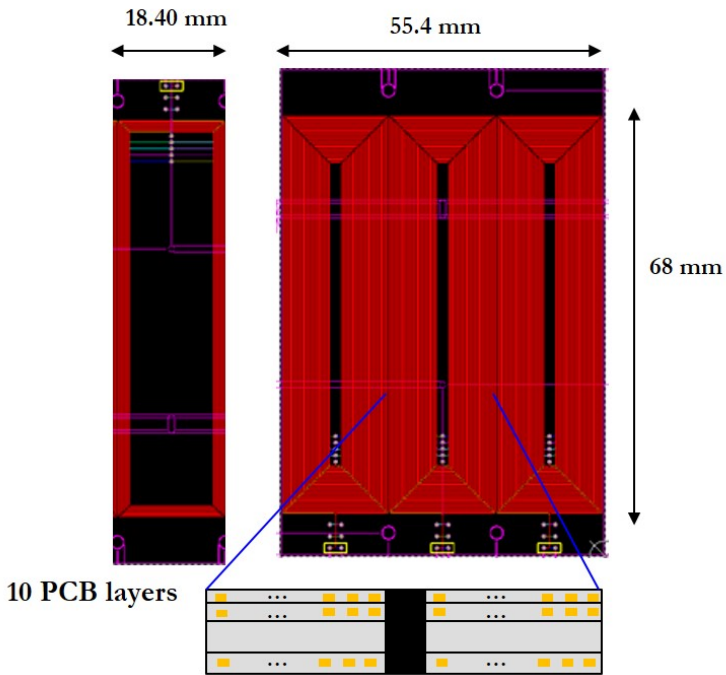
Printed Circuit Board coils: (A) design made by 41 tracks per layers nad (B) 10 tracks per layers.
